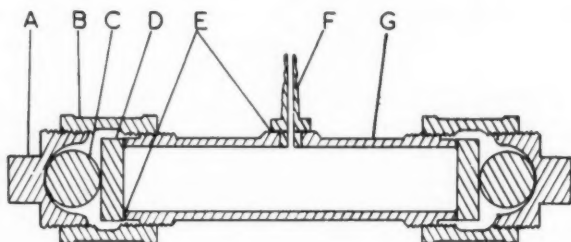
Sectional view of a cylinder showing pipe-plug A, pipe-coupling B, ball bearing C, hardened steel and cap D, rubber gaskets E, outlet to manometers F, and main tube G.
